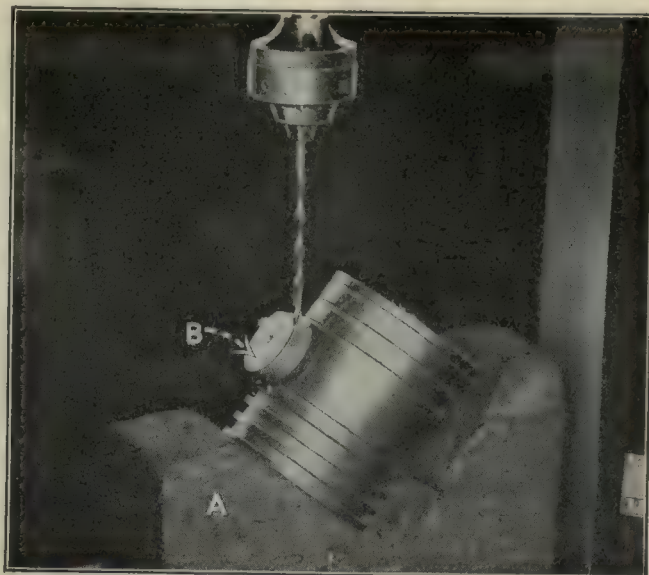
DRILLING PISTON-PIN OIL HOLES
